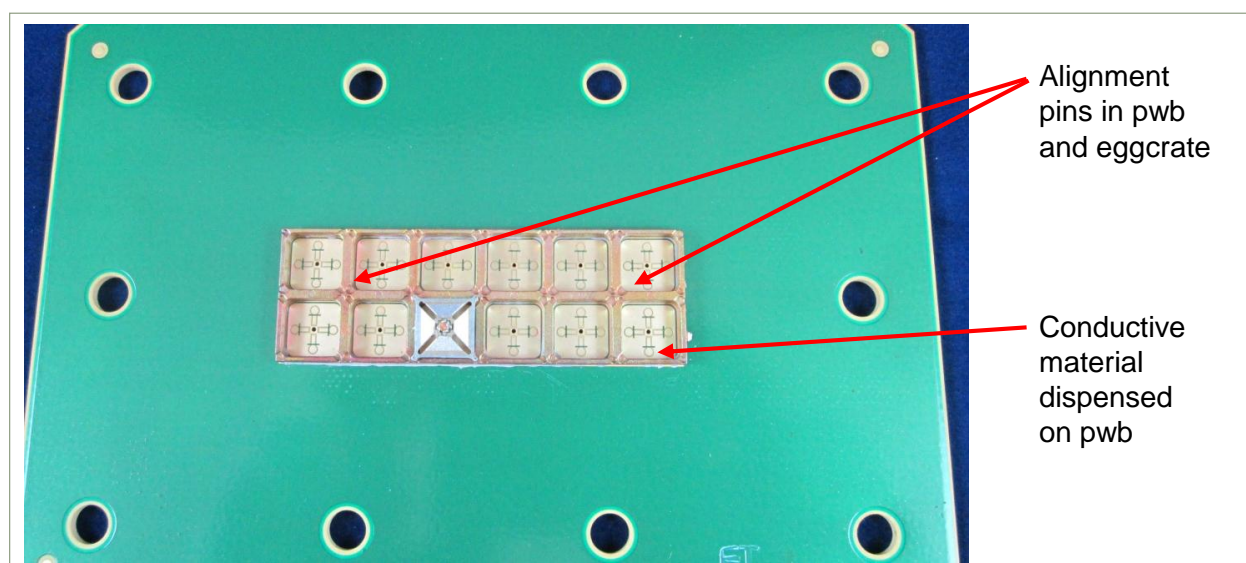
2x6 eggcrate assembled to pwb carrier
